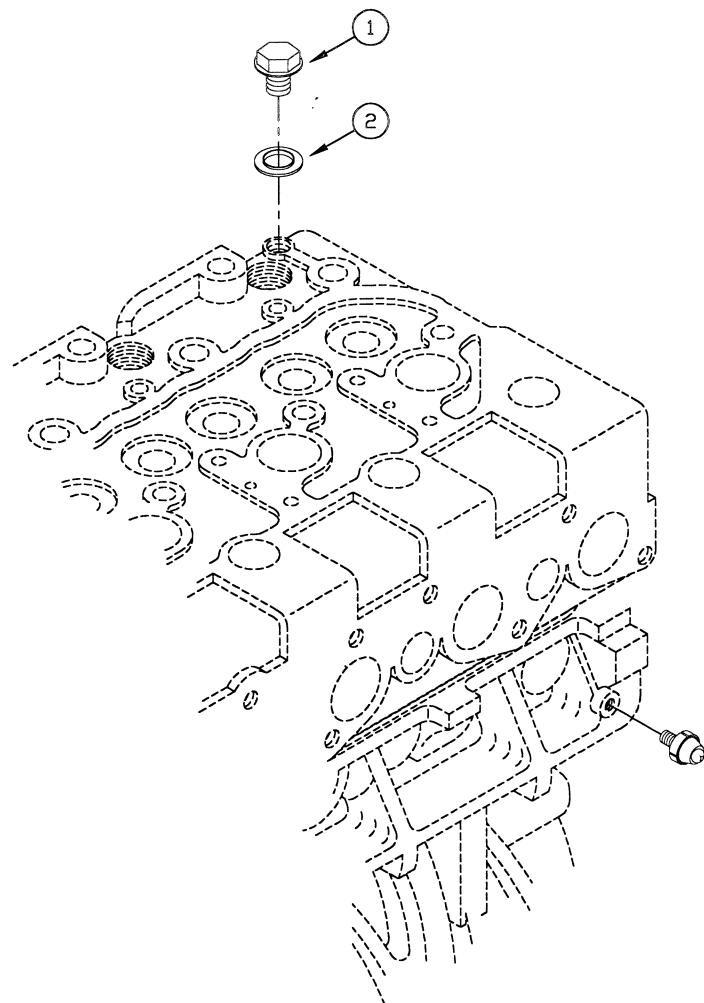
Oil Switch - Thermometer and Plug, Engine Group
